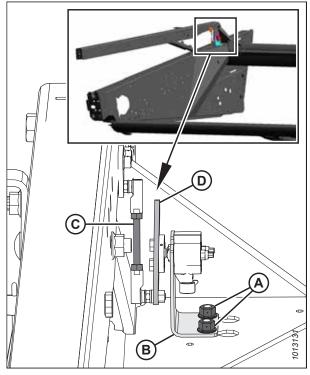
Reel Height Sensor – Front View of Right Reel Arm
